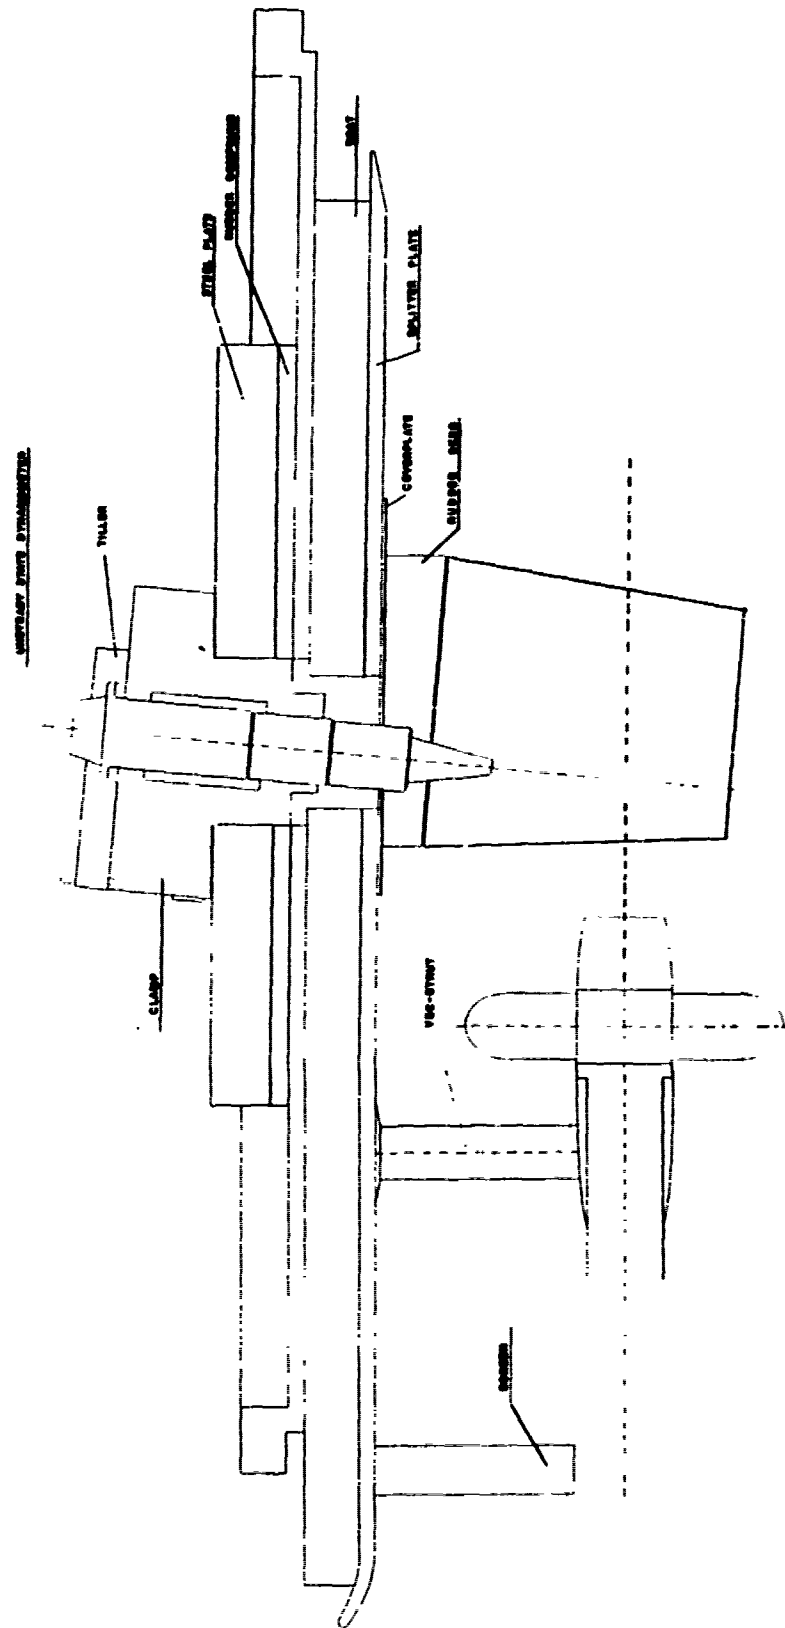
Assembly drawing of equipment mounted in the water tunnel test section
